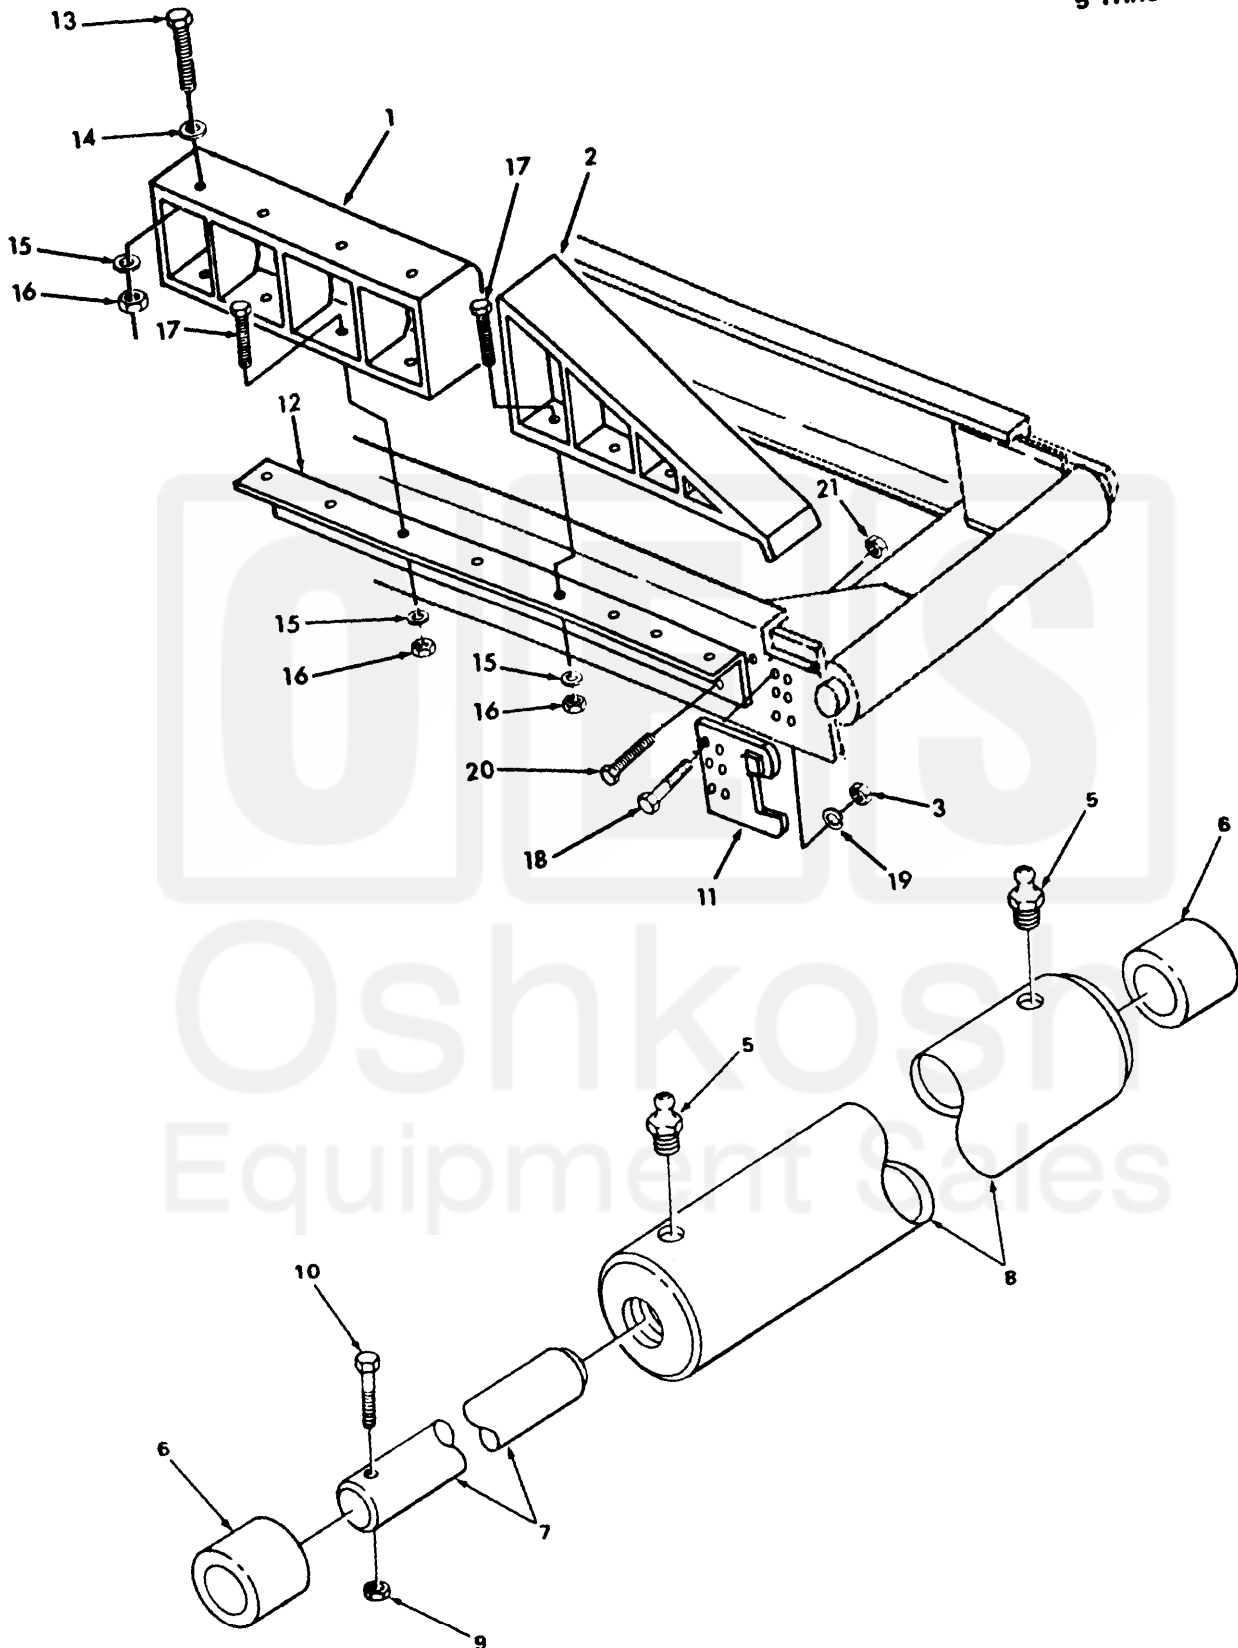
TAIL ROLLER ASSEMBLY AND RAMPS.
